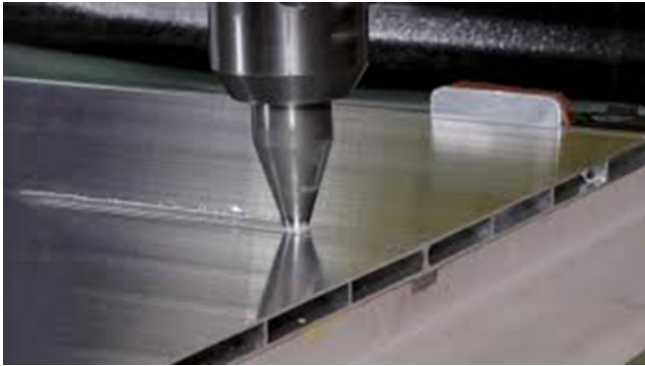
[Picture courtesy: Belgian welding Institute]
